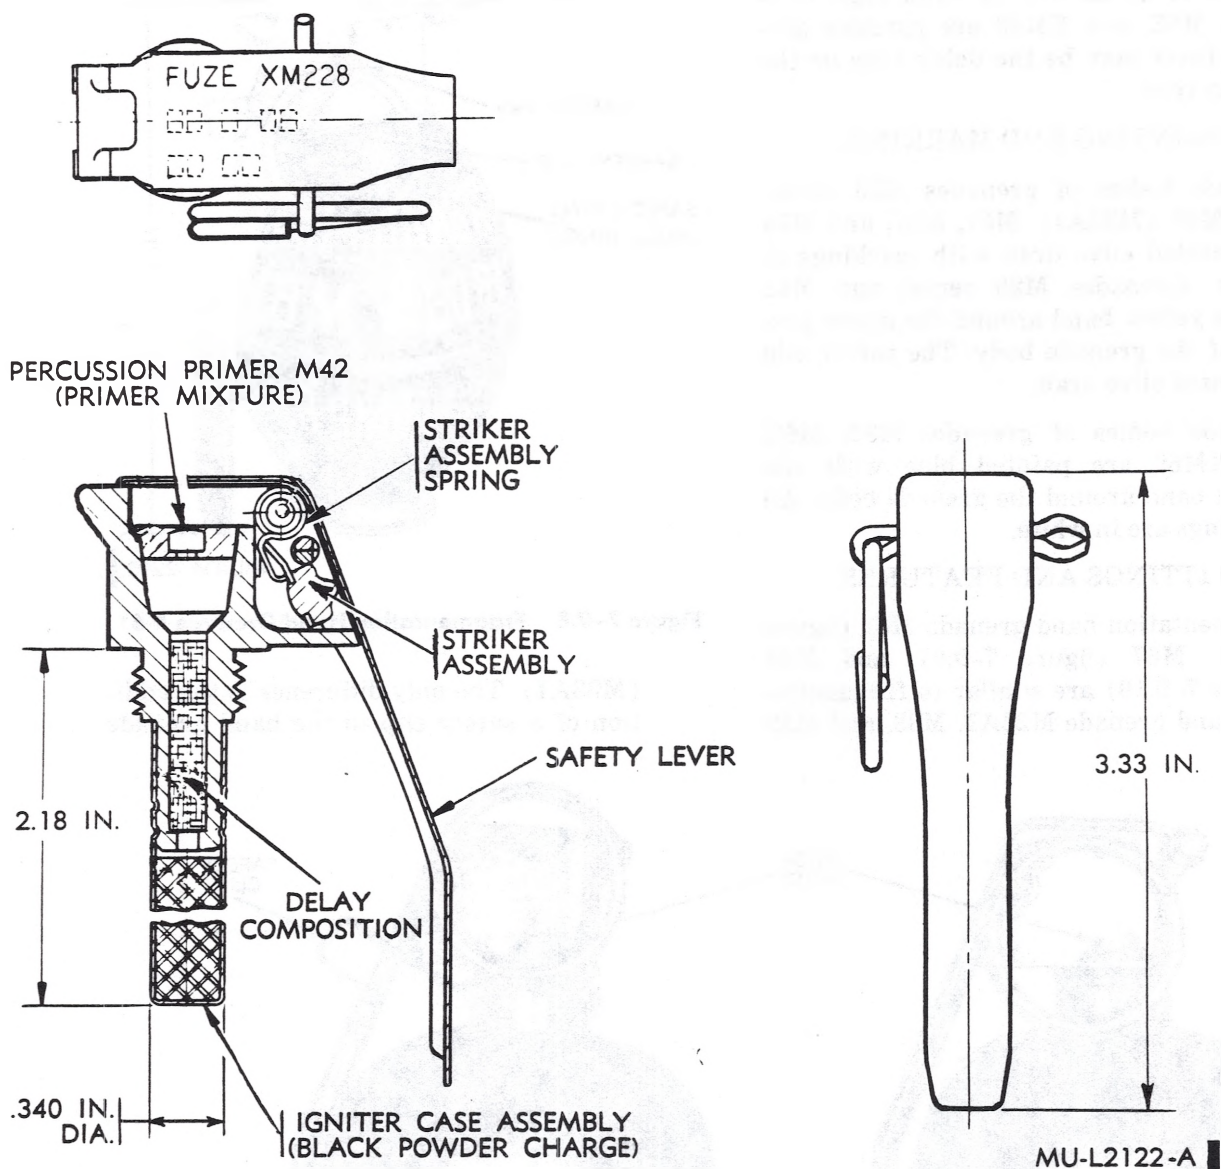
Fuze XM228—Cross-Sectional View
